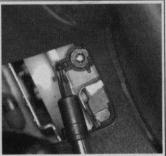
The retaining screws usually require a Torx® drive tool to remove them
